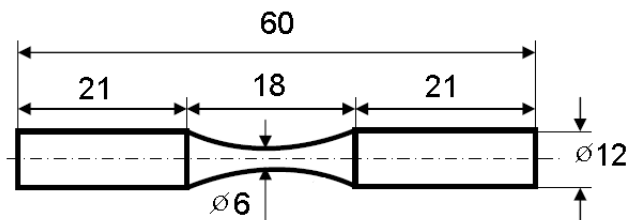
Geometry of the specimen used in the rotating bending fatigue tests
